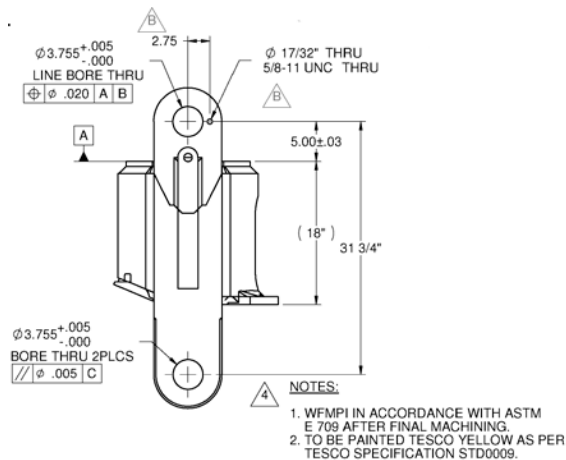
Former Pin Retention Bolt Hole Location on Split Block Adapter
